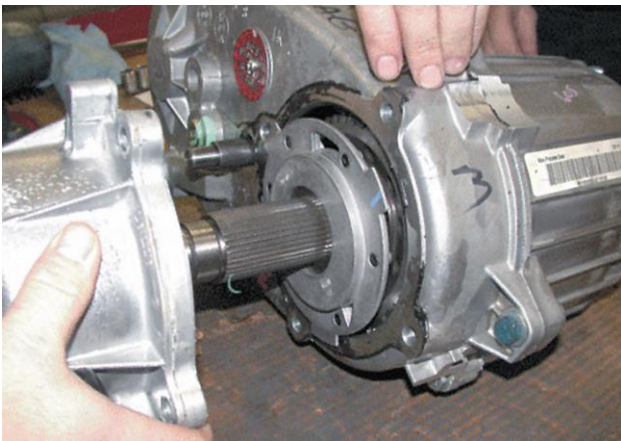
The lubricating oil pump is visible after the cover and bearing assembly have been removed.
